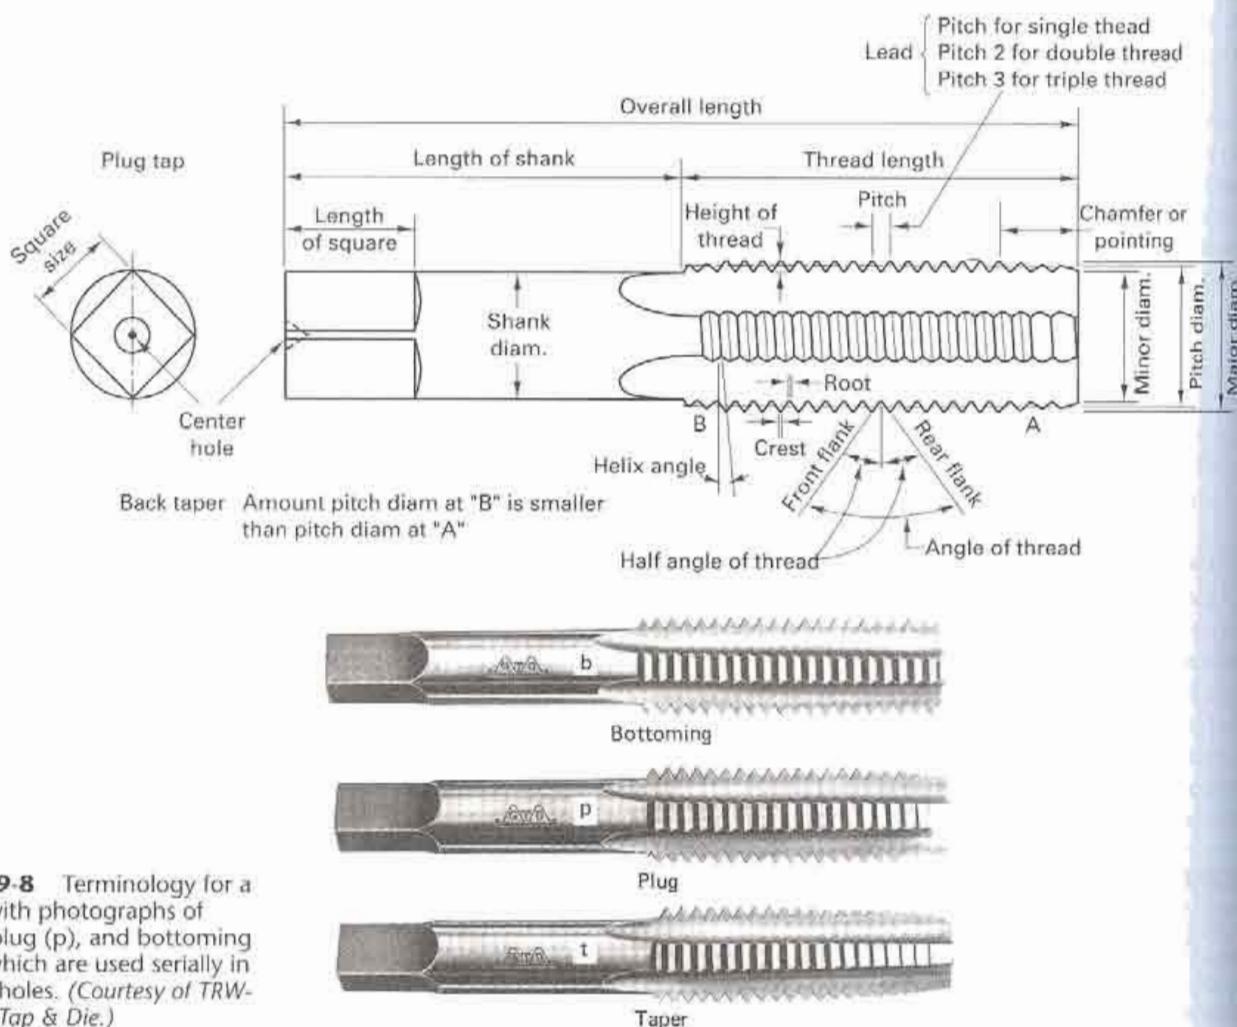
Terminology for a plug tap with photographs of taper (t), plug (p), and bottoming (b) taps, which are used serially in threading holes. (Courtesy of TRW-Greenfield Tap & Die.)
